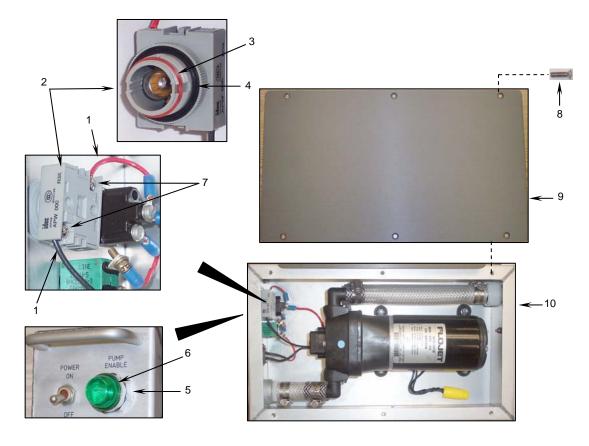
Installing the Sink Fill Pump Assembly Indicator Light Assembly.
